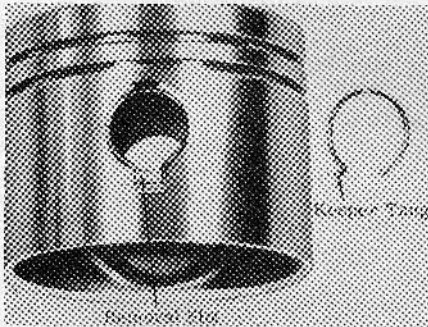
The tang on the piston pin keeper must be correctly installed in removal slot of the 2 inch diameter pistons.
